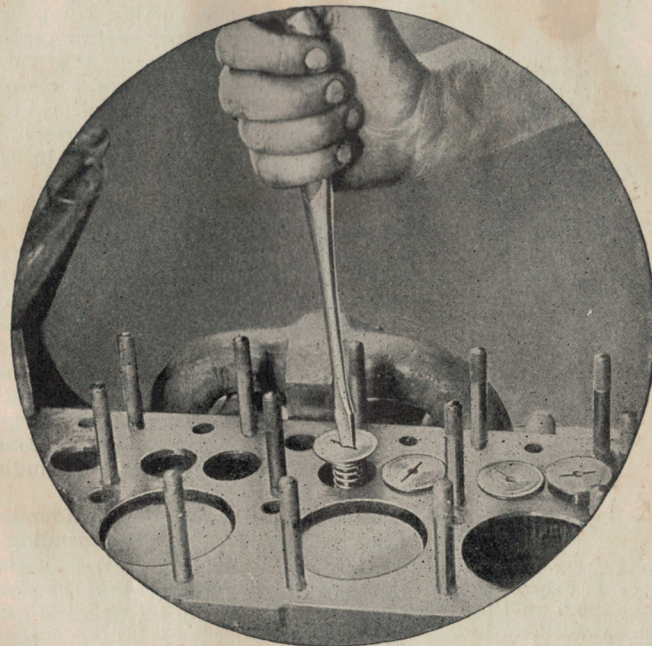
GRINDING-IN VALVE WITH SCREWDRIVER
